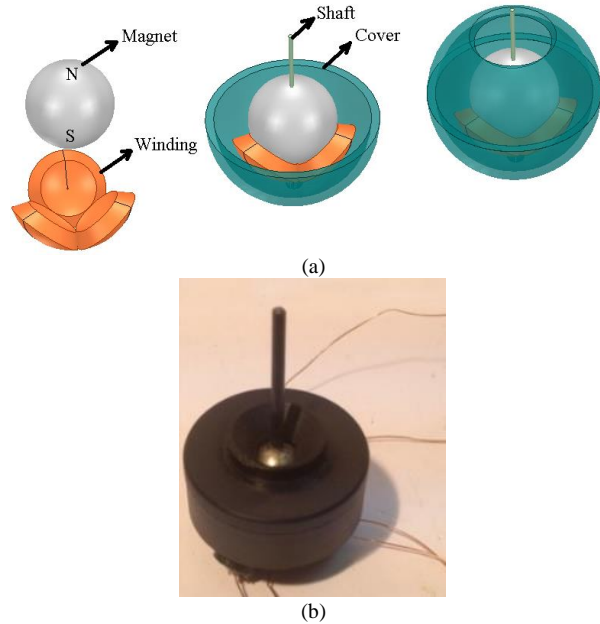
a) Designed stator, windings and general appearance of the spherical motor, b)Prototype motor
